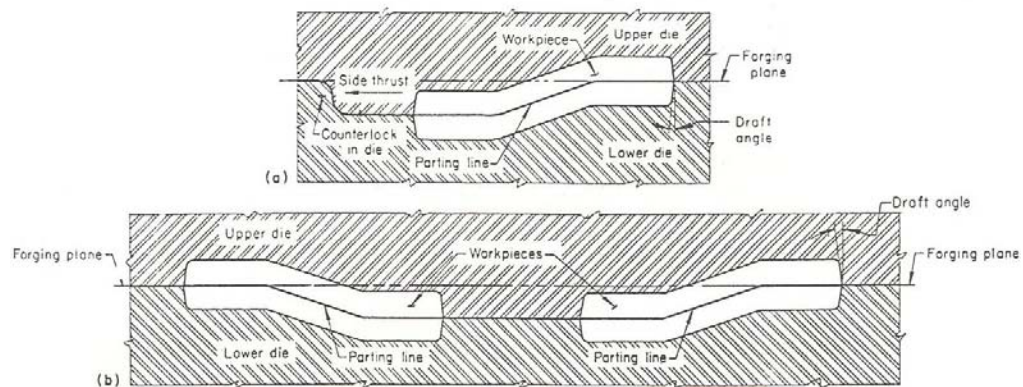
(a) Die Set with Counterlock, (b) Balanced Pair of Forgings in a Single Die Set [25]
